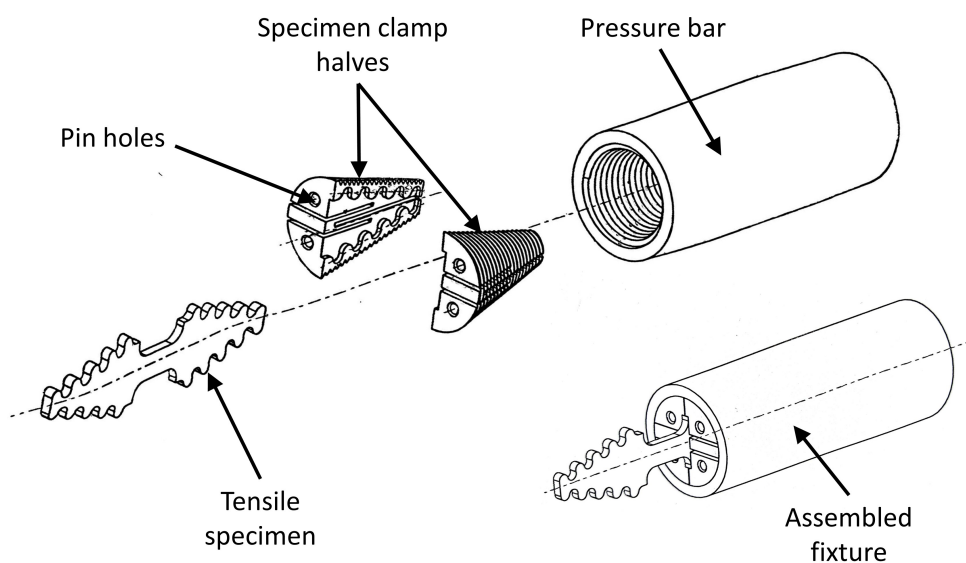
Assembly of the fir-tree fixture design, adapted from the drawing by Yende [89]
